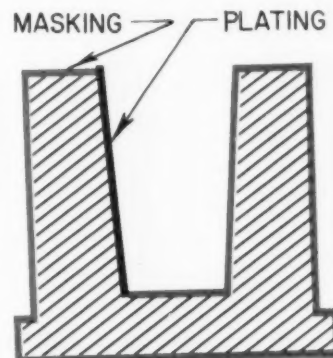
Plating on side surface of deep hole is easier if done in stages. Here one side is masked; other is plated
